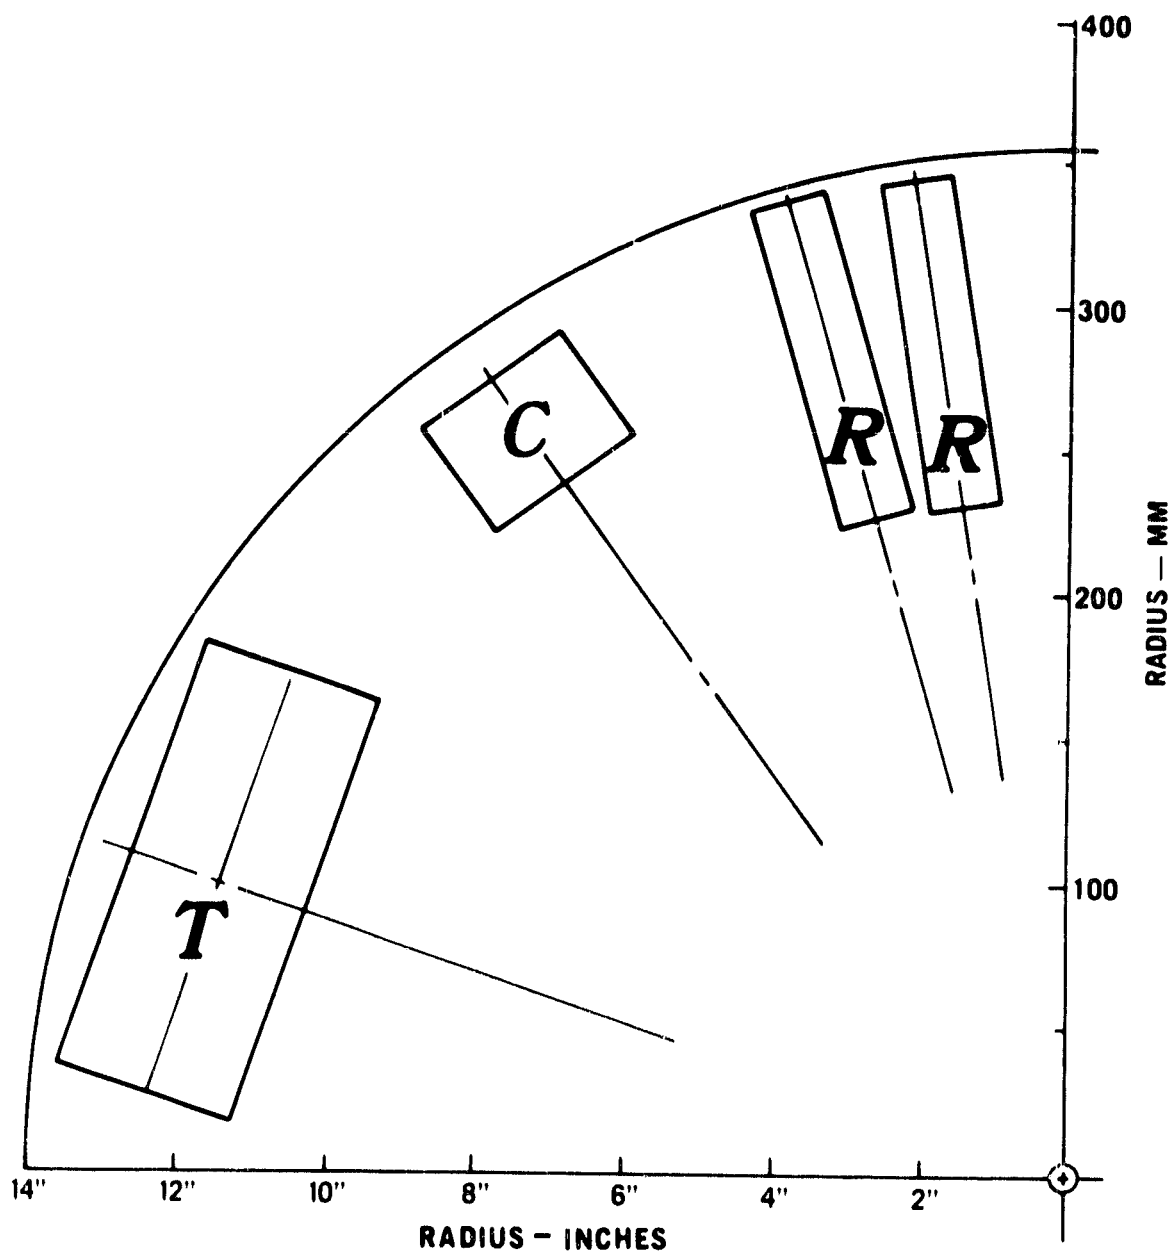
Location of Mechanical Test Specimens on Regenerator Core
